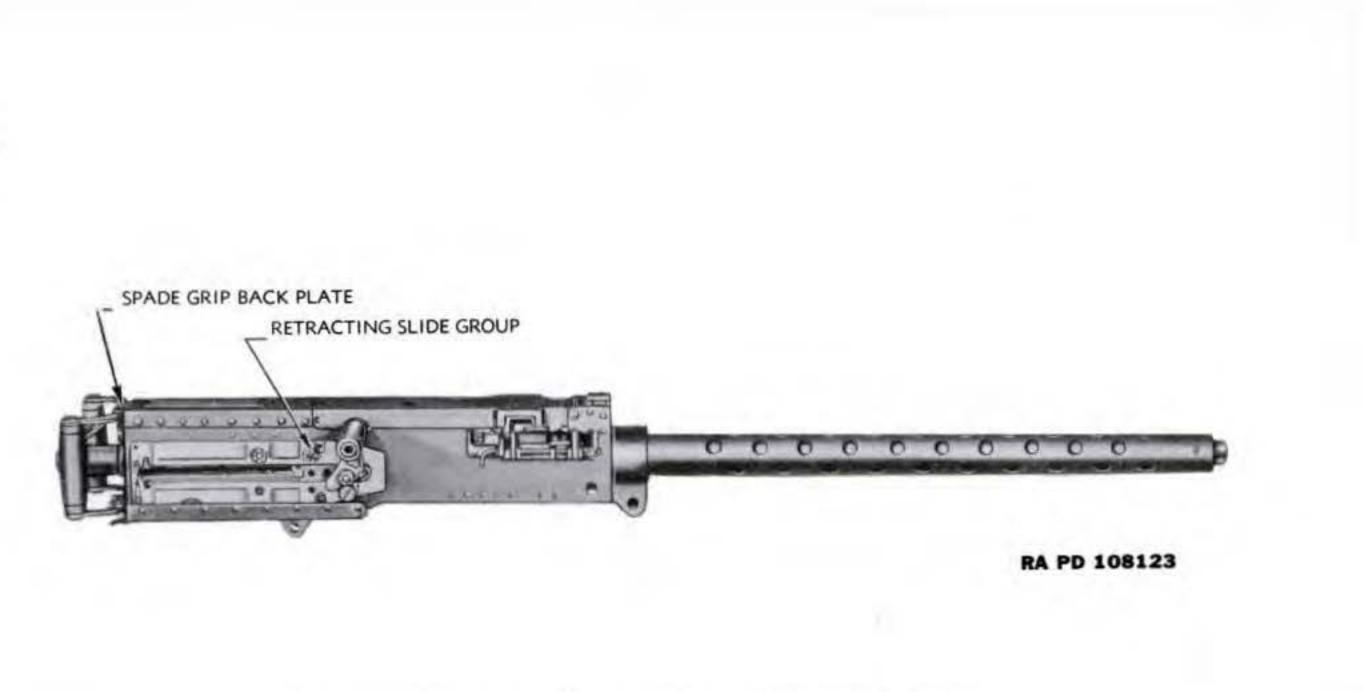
Browning machine gun, cal..50, AN-M2, aircraft, basicwith retracting slide group and spade grip back plate. e. A new type trigger bar pin assembly has been designed which can be removed without first having to remove the retracting slide, when it is assembled on the left side of the gun. The new type pin has a wire lock which is securely held against the re-
